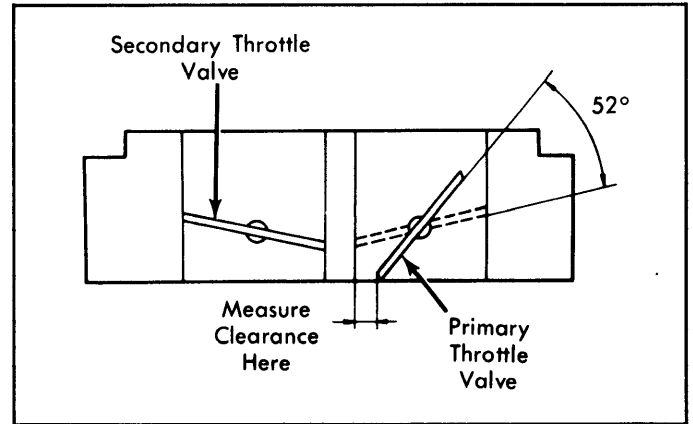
Secondary Throttle Valve Opening Clearance Adjustment
